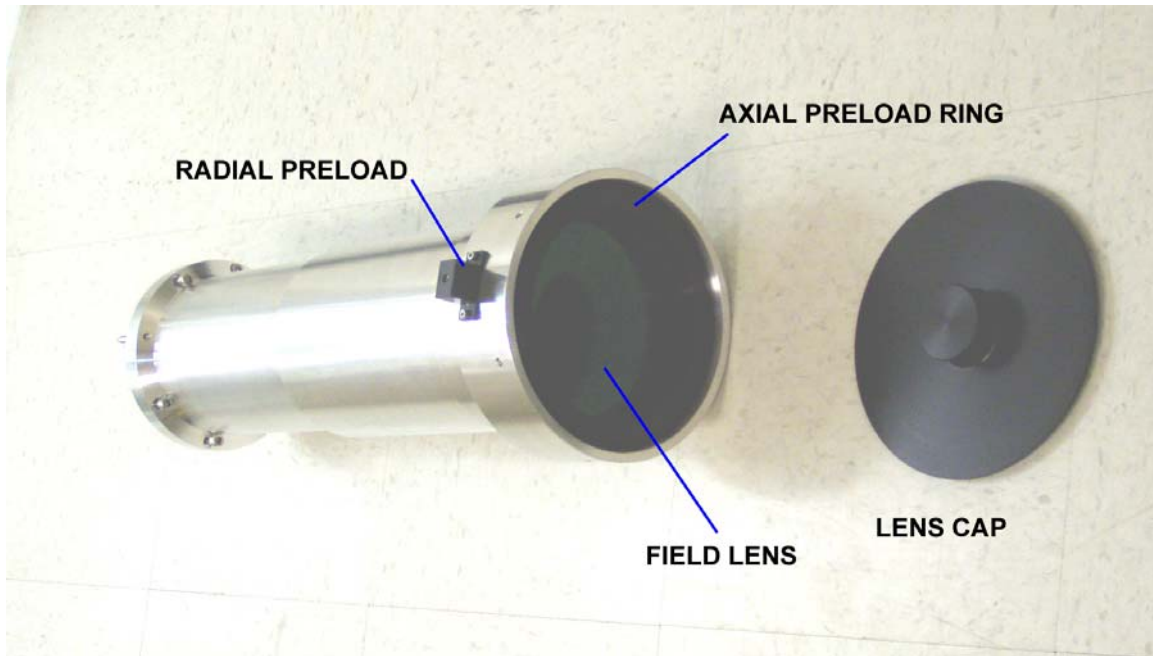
Front view of the OIWFS Field Lens Tube, showing the preloads and the removable lens cap.
